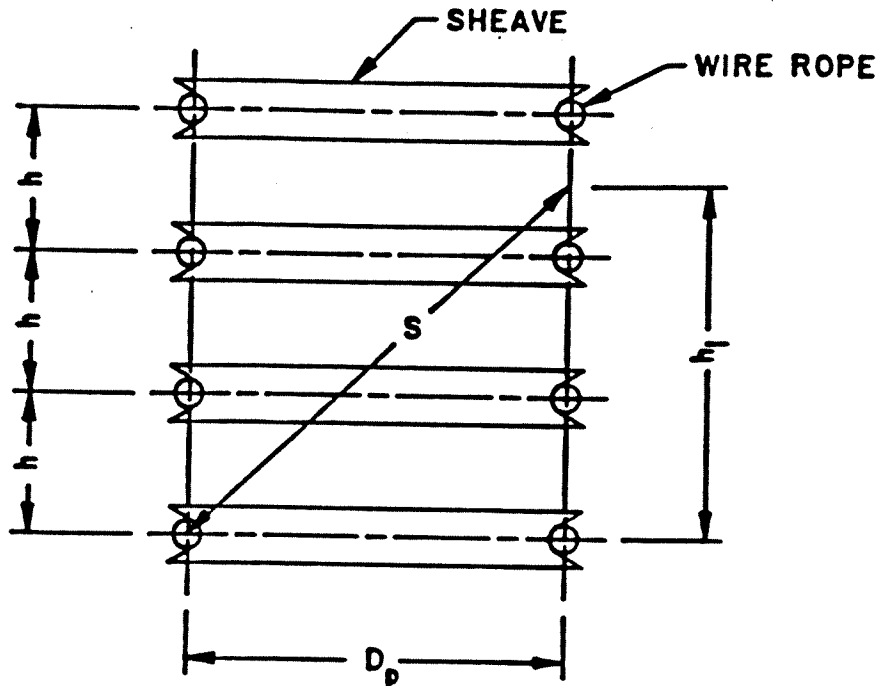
Effective Wire Rope Spacing in a Multiple-sheave Block
